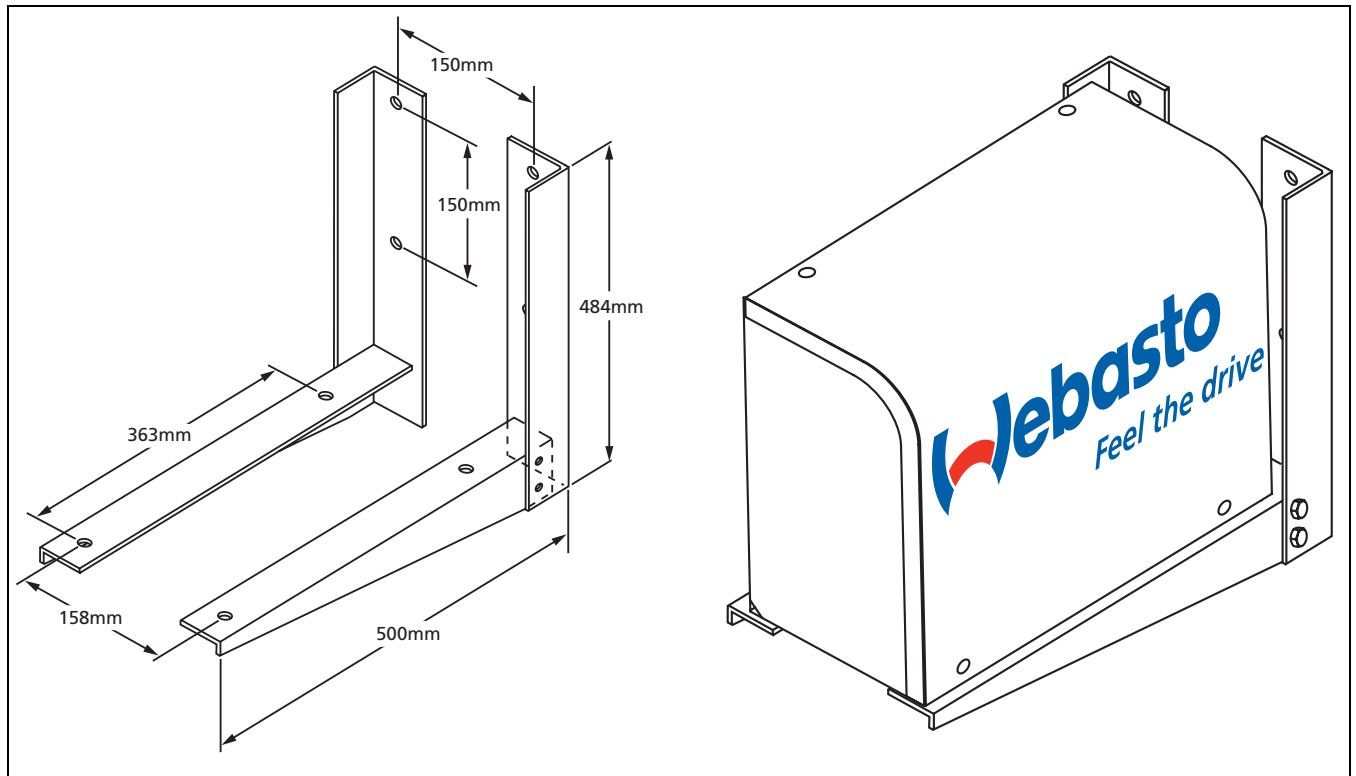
Optional perpendicular mounting with bracket kit P/N 905822 or P/N 905838 (Freightliner style)
